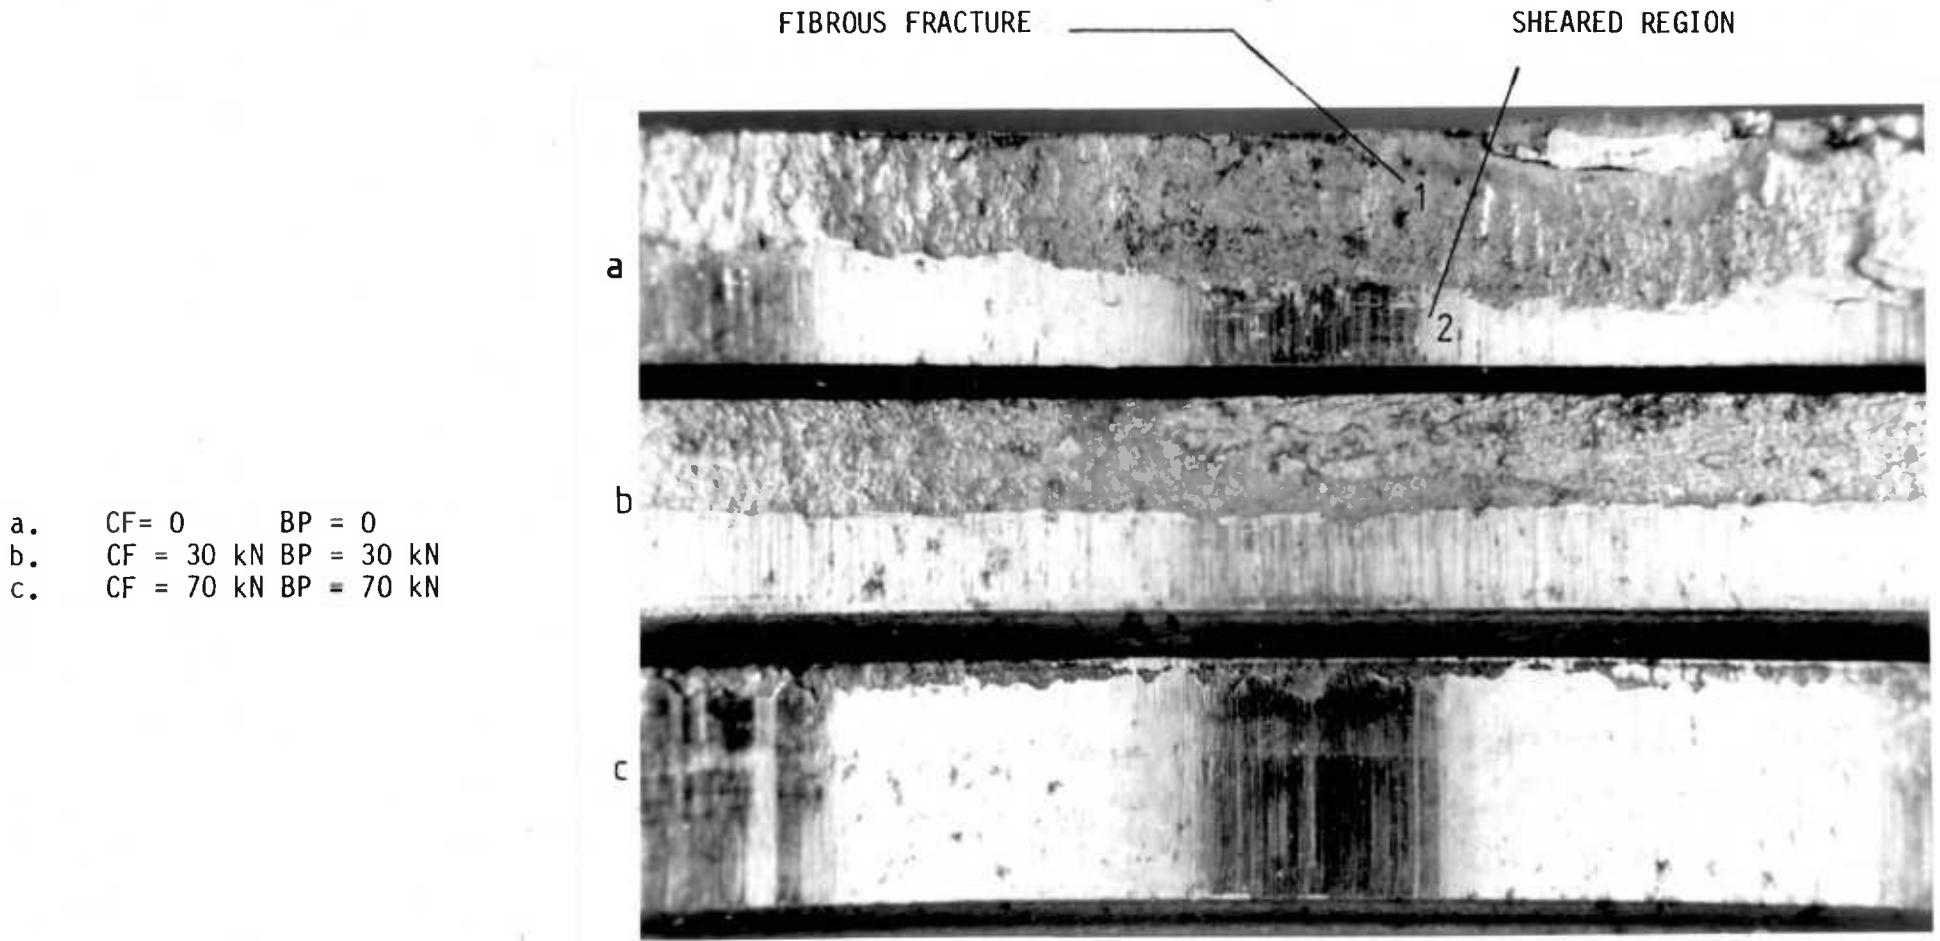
Transition from fibrous fracture to pure shear when using clamping force and back-load for a $t = 0.120$ in. (3.04 mm) thick strip of mild steel.
